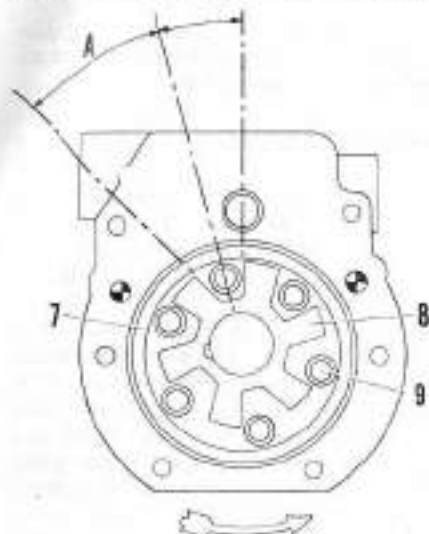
When installing carrier, the larger angle (A) of roller slot should be toward direction of pump rotation. Refer to Fig. 22 for parts identification.
